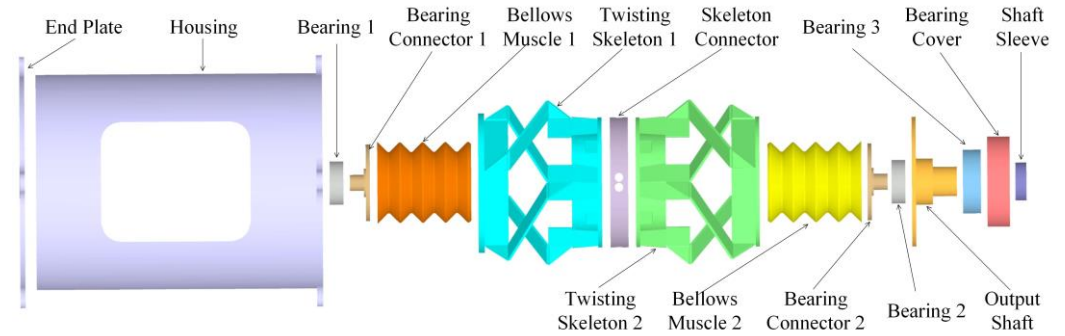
Exploded view of the soft-rigid hybrid rotary joint.
